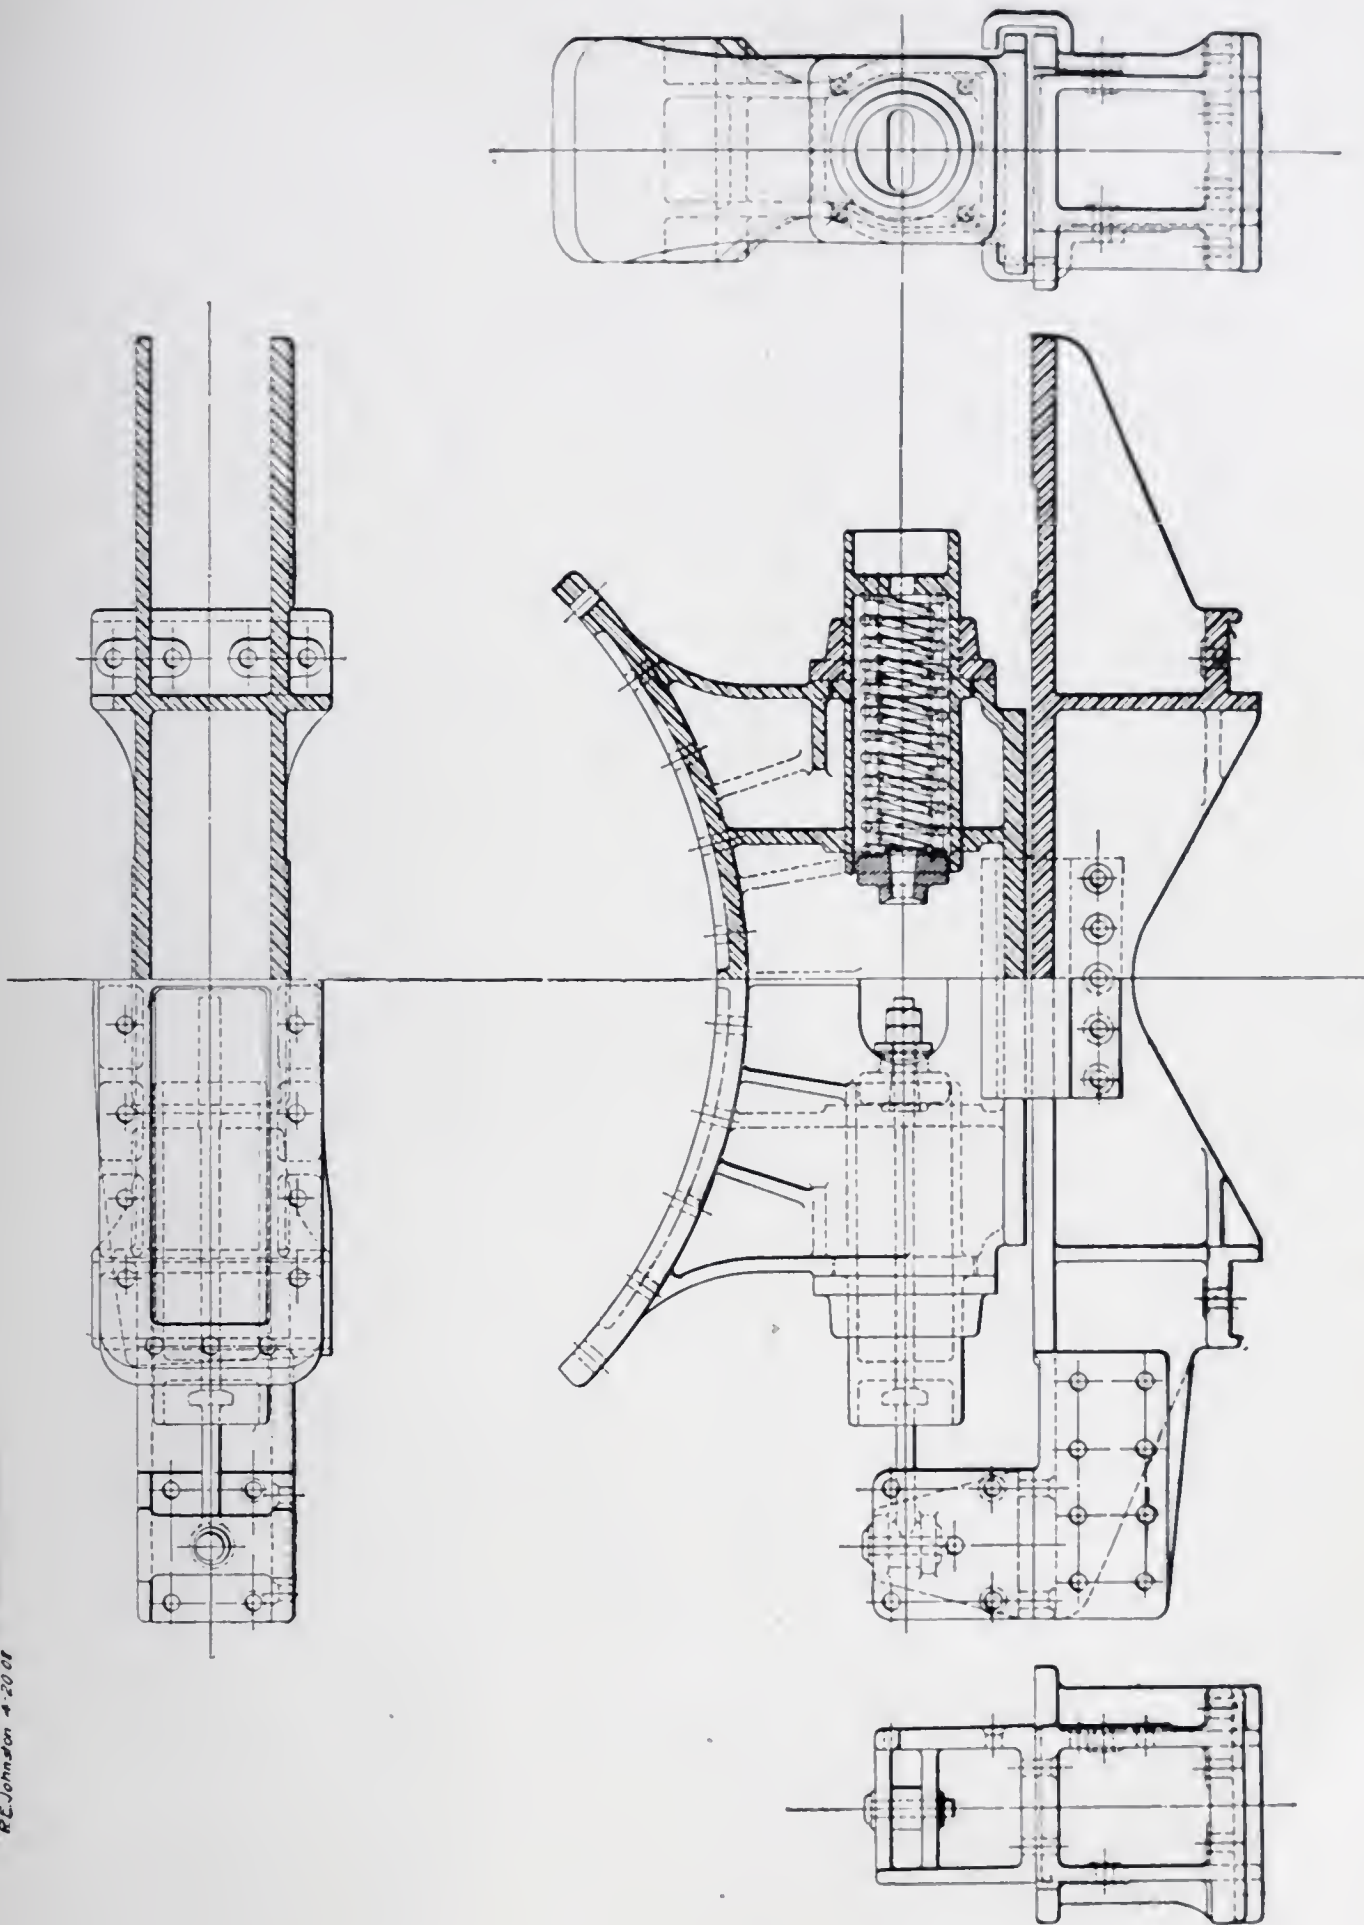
THRUST SPRINGS AND BEARINGS.
